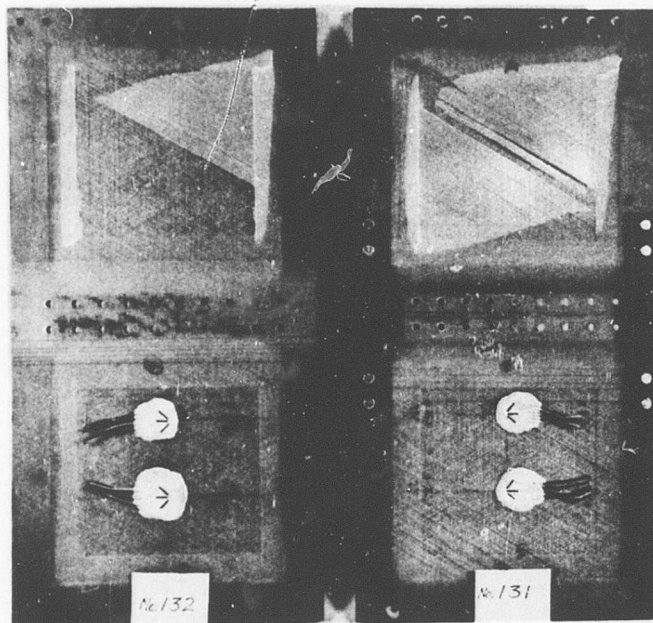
Specimens 131 and 132 - Bag Side Showing Failure Areas.
